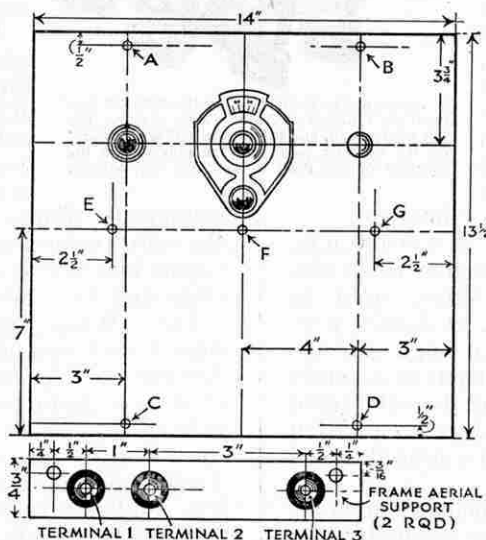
Diagram showing front panel layout and frame support dimensions.
